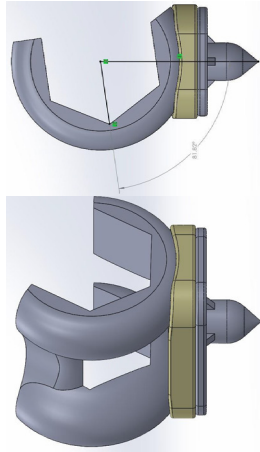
(a) Solid Prototype Isometric and (b) Side View
